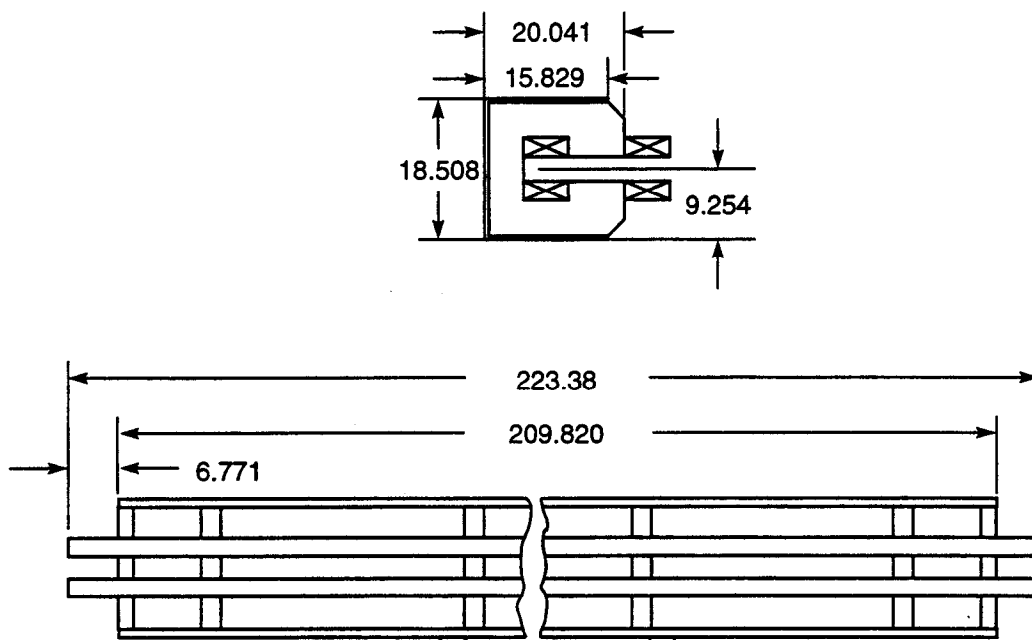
End and side views of the HER bending magnet. Dimensions are given in inches.
